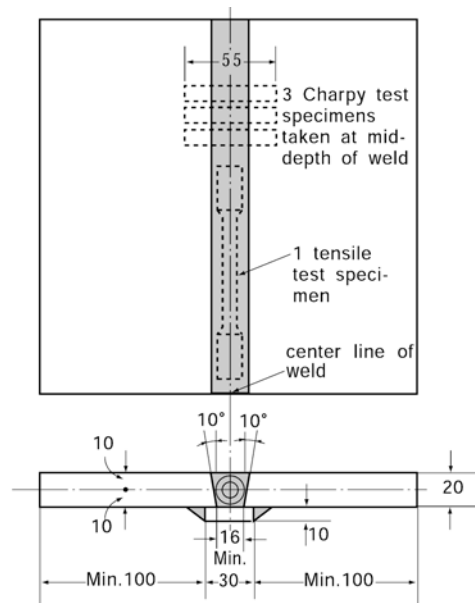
Deposited Metal Test Assembly for Electrode for Manual Arc Welding (unit : mm)
